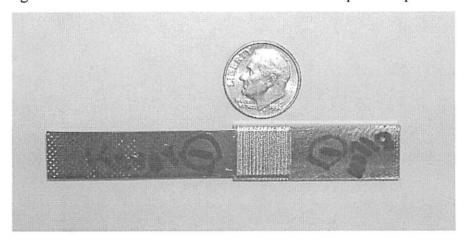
Close-up of Laser Welded "Full" Inconel 718/Kovar Lap Shear Specimen; (left) Kovar and (right) Inconel 718 that is ~0.5" wide.
